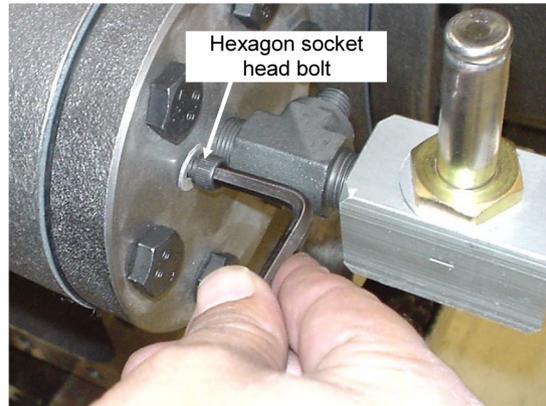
Insertion of the Hexagon Socket Head Bolt
